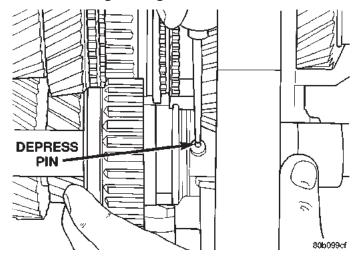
Depress Pin In Reverse Idler Gear Shaft
